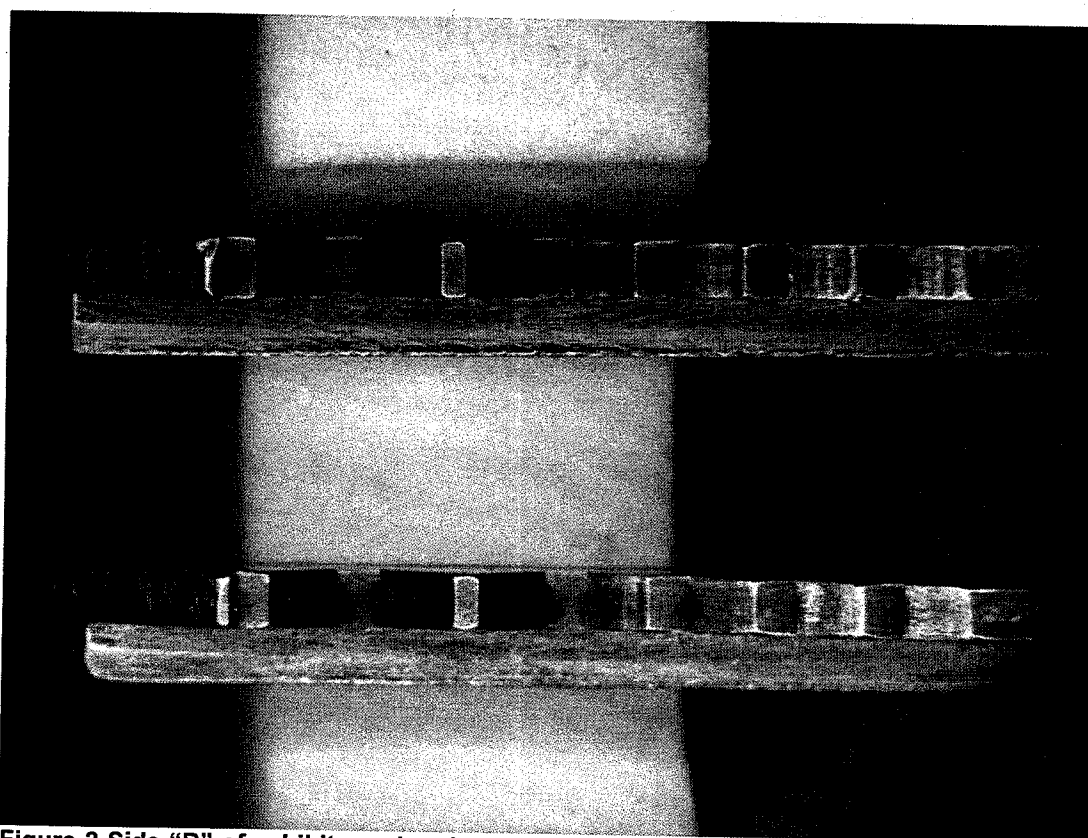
Side "B" of exhibit number 1 on the bottom indicating no unusual tool markings relating to recent duplication
